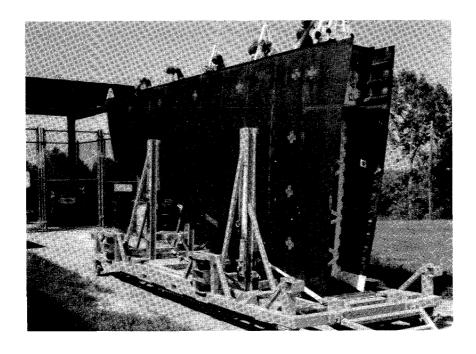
Shipment of fin box on specially designed, shock-mounted dolly.
